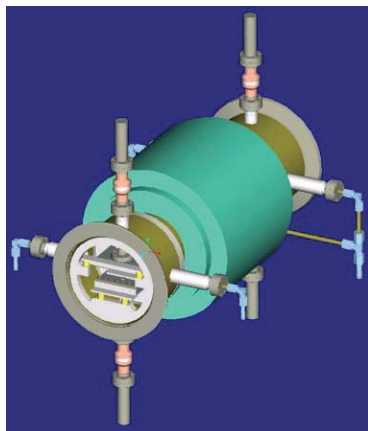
Complete chopper with vacuum tank mounted in a quadrupole [17].
